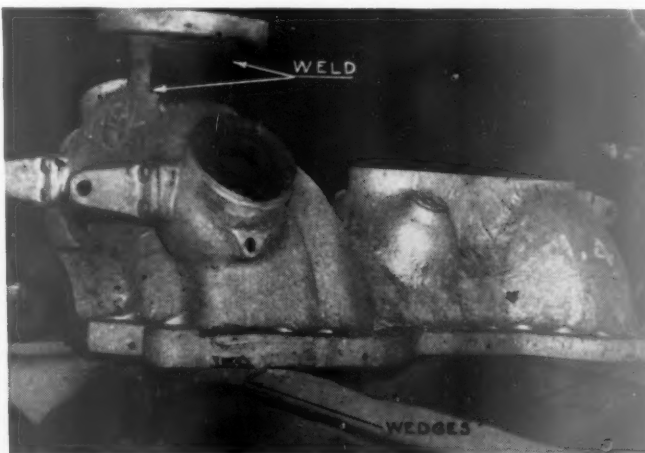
Repair welded H. P. Turbine casing on furnace car bottom, after stress relieving.
